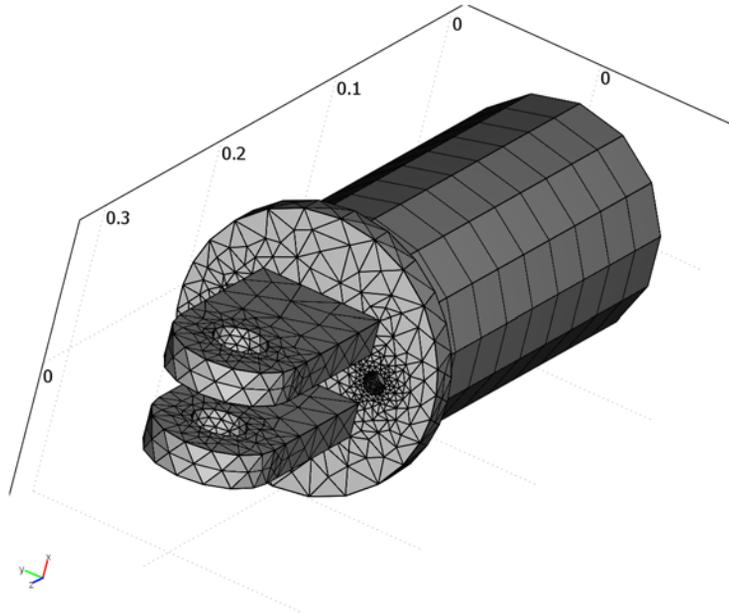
Finite-element mesh of the diagonal mounting assembly.
